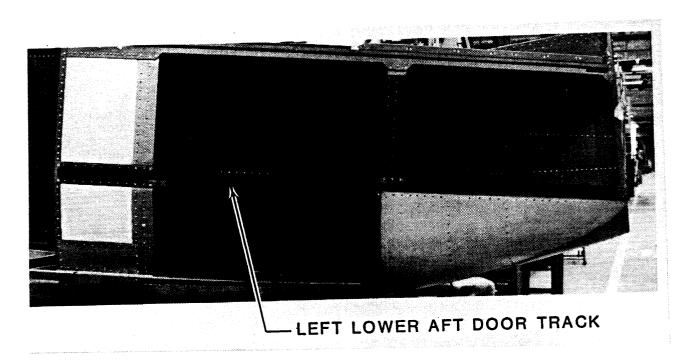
Left lower aft cargo door track during helicopter assembly.
